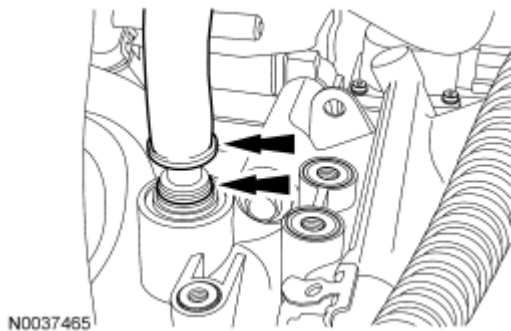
Locating Locking Ring And Brake Booster Vacuum Supply Tube
